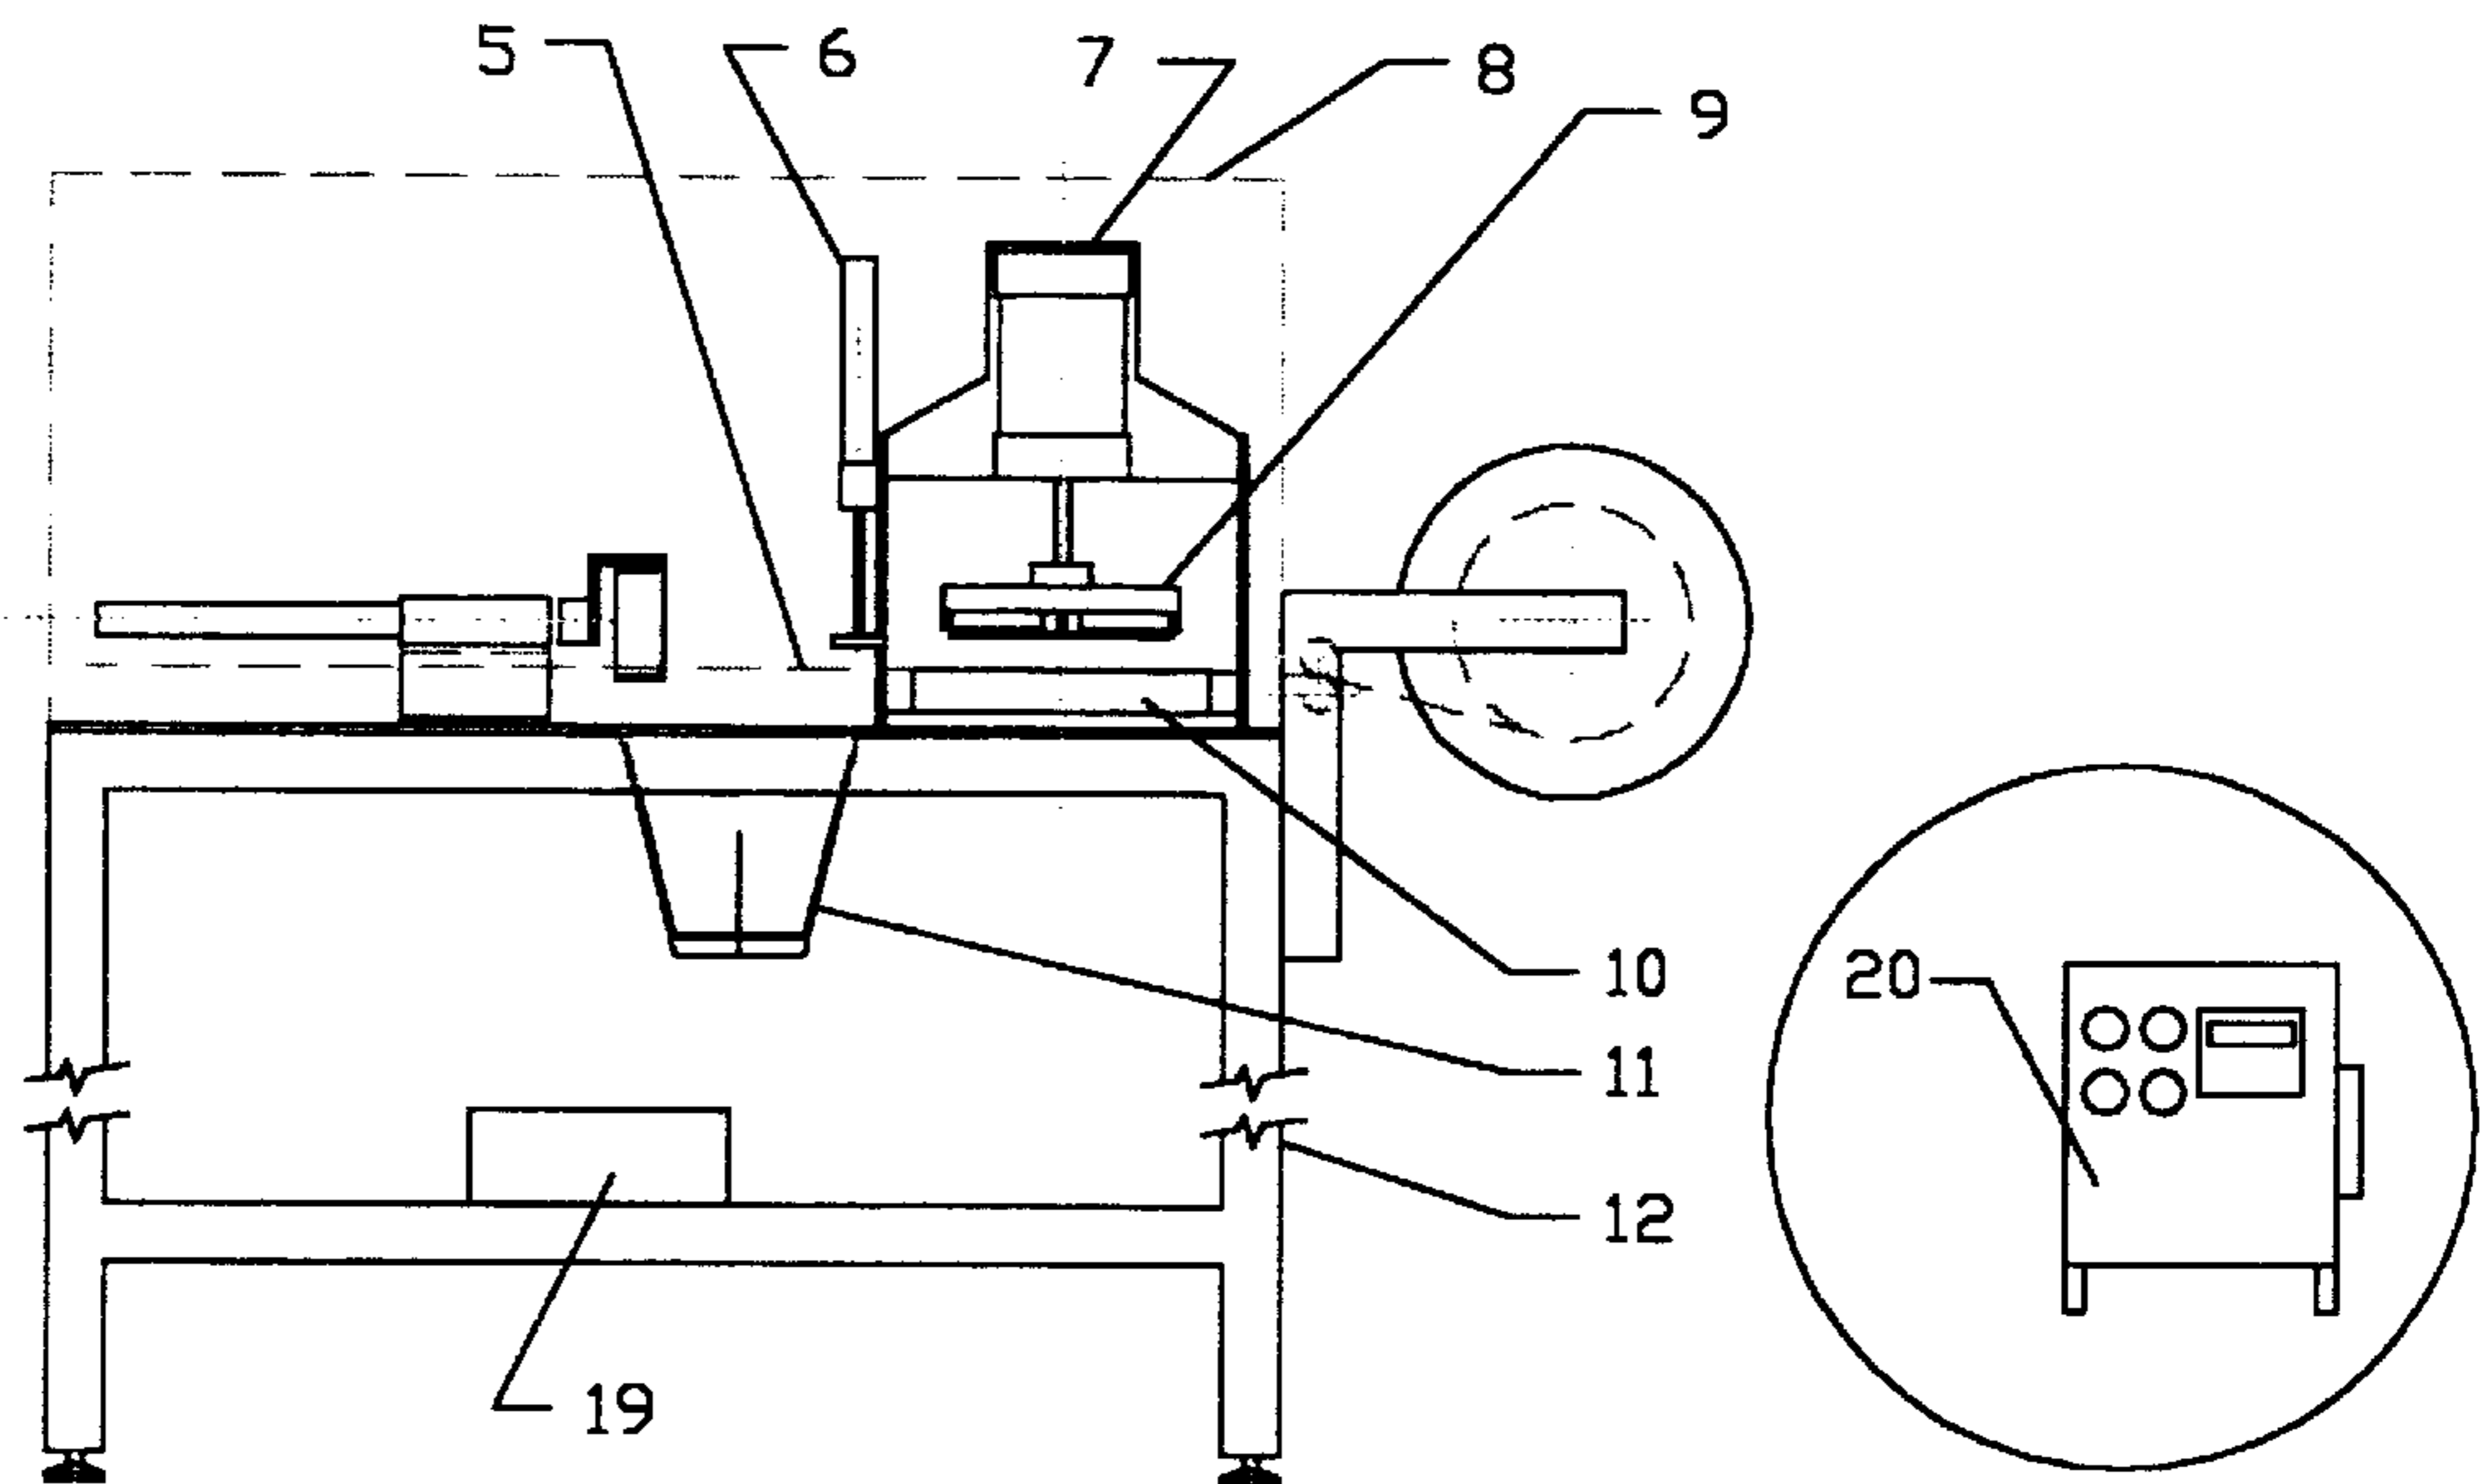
FRONT ELEVATION & RIGHT ELEVATION INSET
